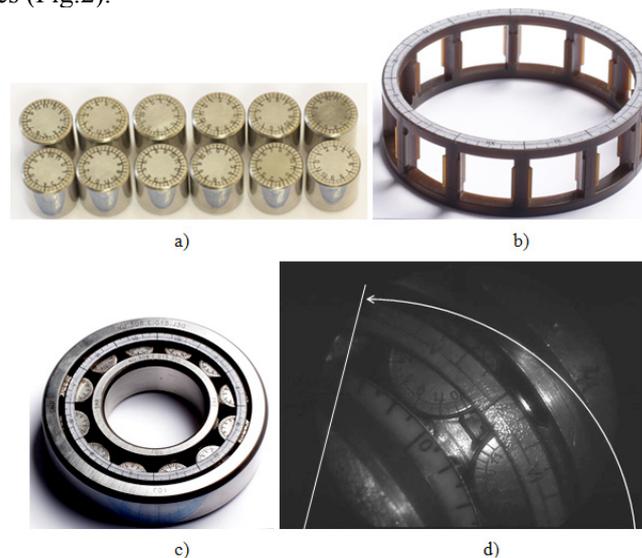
The marking of roller bearing items and a sample of video shooting frame obtained in process of investigation: a) set of rollers; b) bearing cage; c) bearing assembly; d) a sample of a frame with the roller bearing, with the statement of sector of observation
